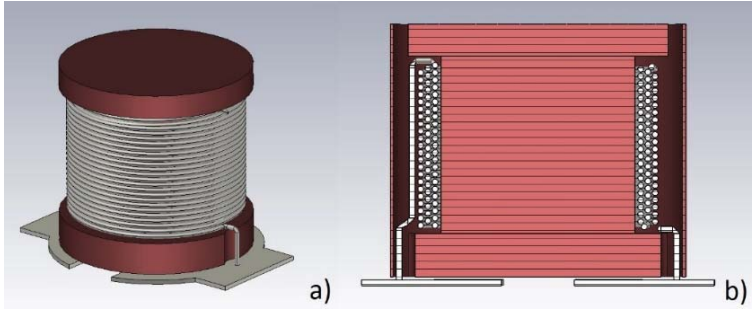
3D model of surface assembly component WE 7447709471: a) 3D model of the component without an external core; b) cross section of the 3D model.
